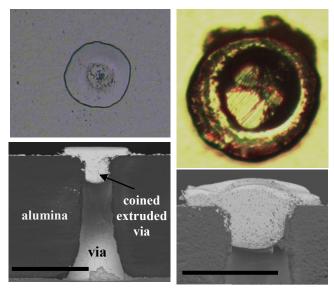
Left: Top-view and cross-sectional view of extruded via after coining; Right: Top-view and cross-sectional closeup of extruded via, no coining. (scale bars = 100 µm)
